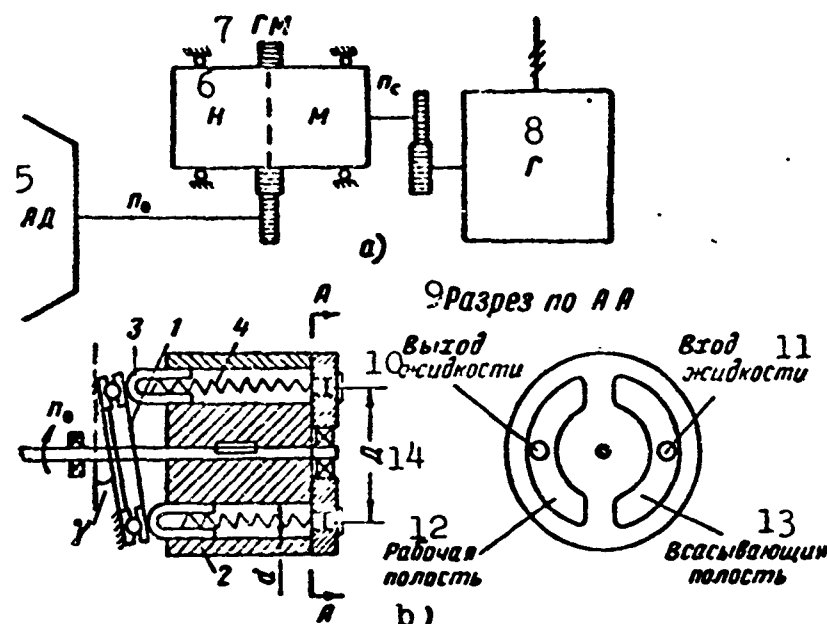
Structural diagram of aircraft hydraulic clutch. a) Diagram; b) principle of hydraulic clutch. 1) Inclined ring; 2) clutch housing; 3) pistons; 4) spring; 5) AD; 6) N; 7) GM; 8) G; 9) section through AA; 10) fluid outlet; 11) fluid inlet; 12) working cavity; 13) intake cavity; 14) D.
